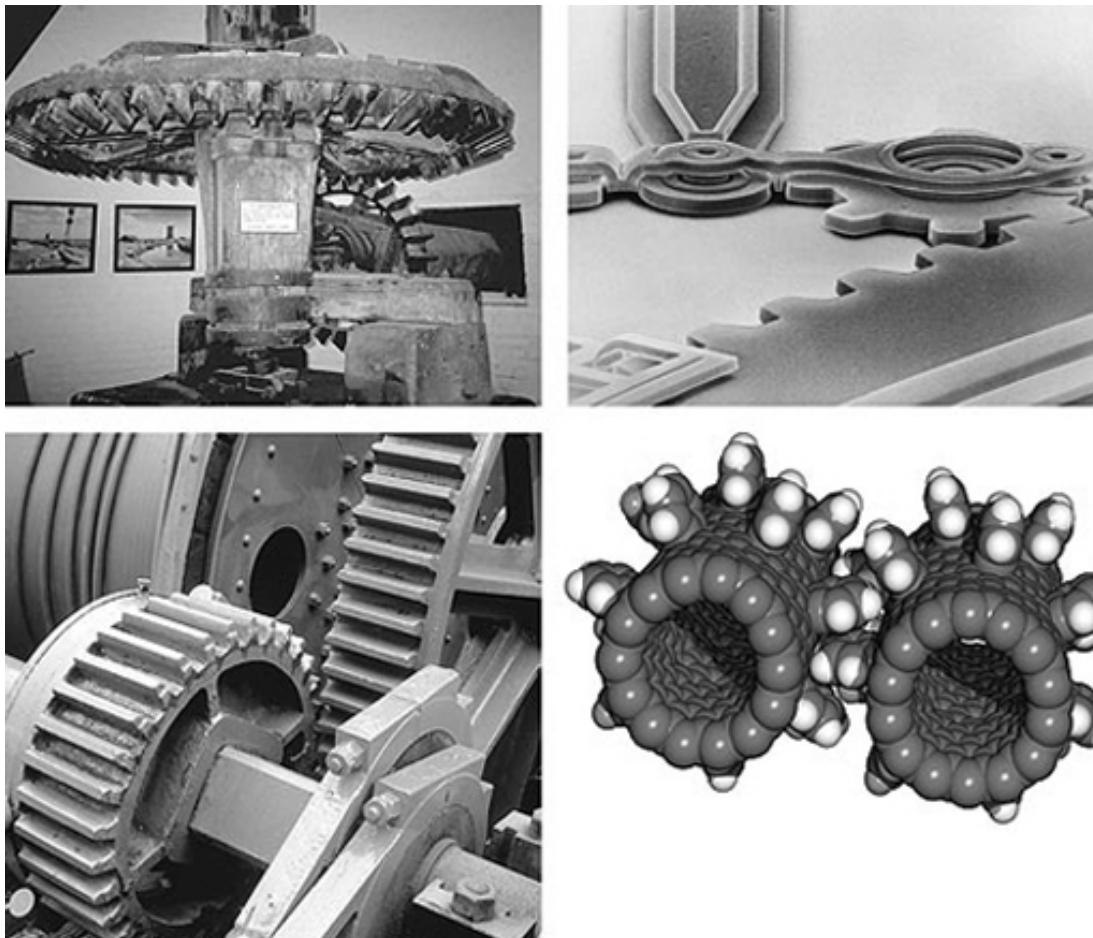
A selection of gears: *top left* wooden gears from a windmill; *bottom left* steel gears from heavy machinery; *top right* gears manufactured using 'micromachining' on a microscopic scale; *bottom right* a theoretical gear built up at an atomic level
